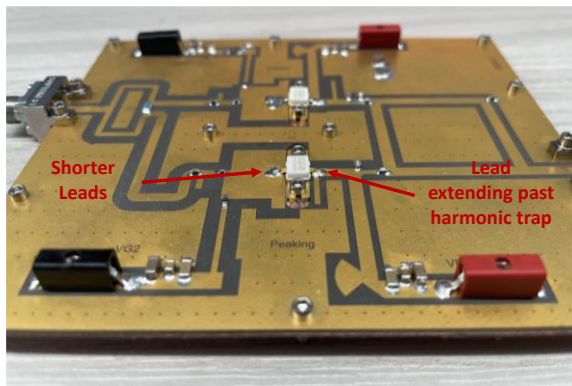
Photograph of DPA Assembly, Side-Profile – Unit 2.
